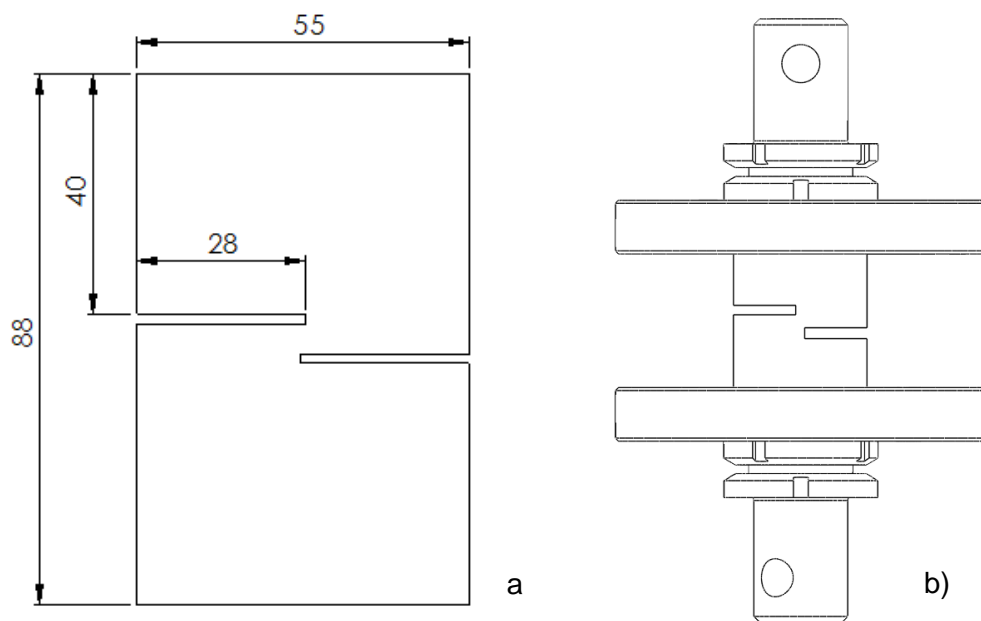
a) Specimen geometry (dimensions in mm); b) testing tool and specimen
